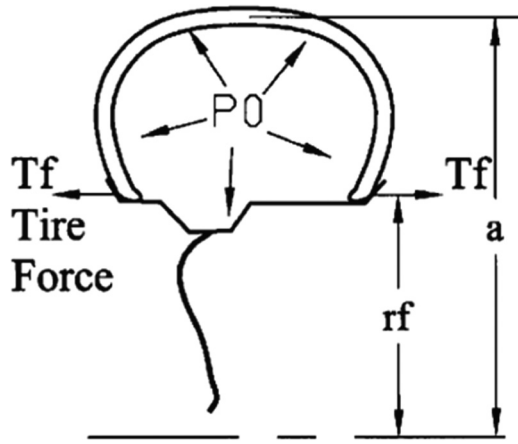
Scheme of axial forces acting on the wheel rim—adapted from Ref. [5]
